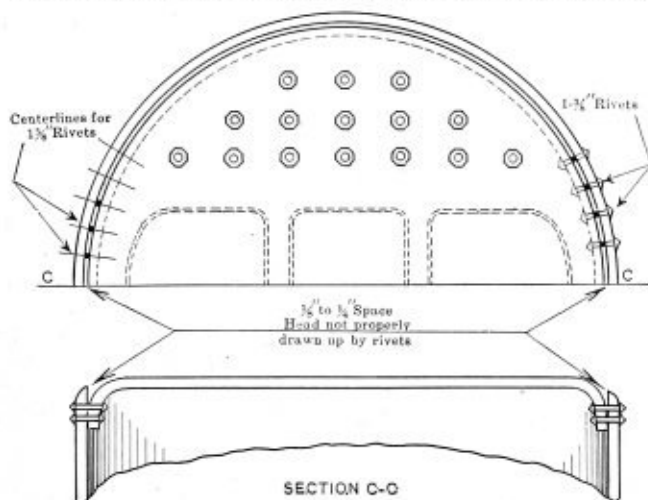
Poor Fit of Boiler Head and Laps Led to Re-riveting
